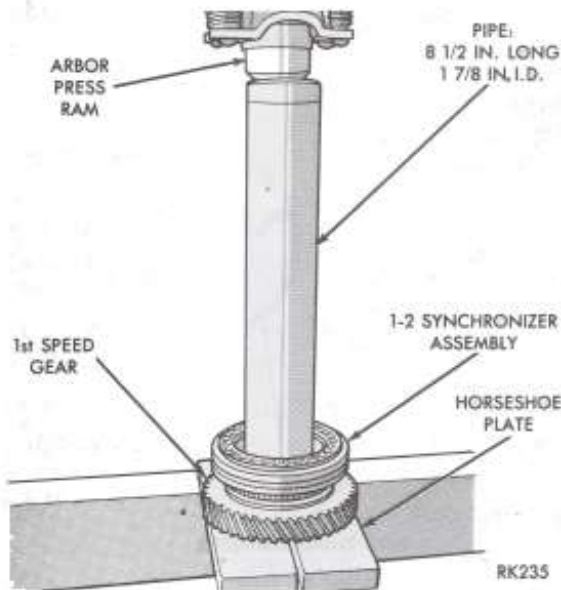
Install 1-2 Synchronizer Assembly (A525)
